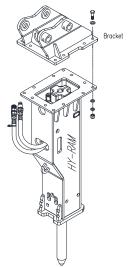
Housing Box, Mounting Bracket & Bolt Set
